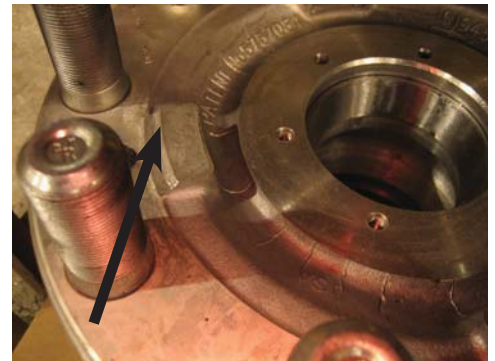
Note the damage to the drum pilot boss caused by a mis-mounted brake drum.
